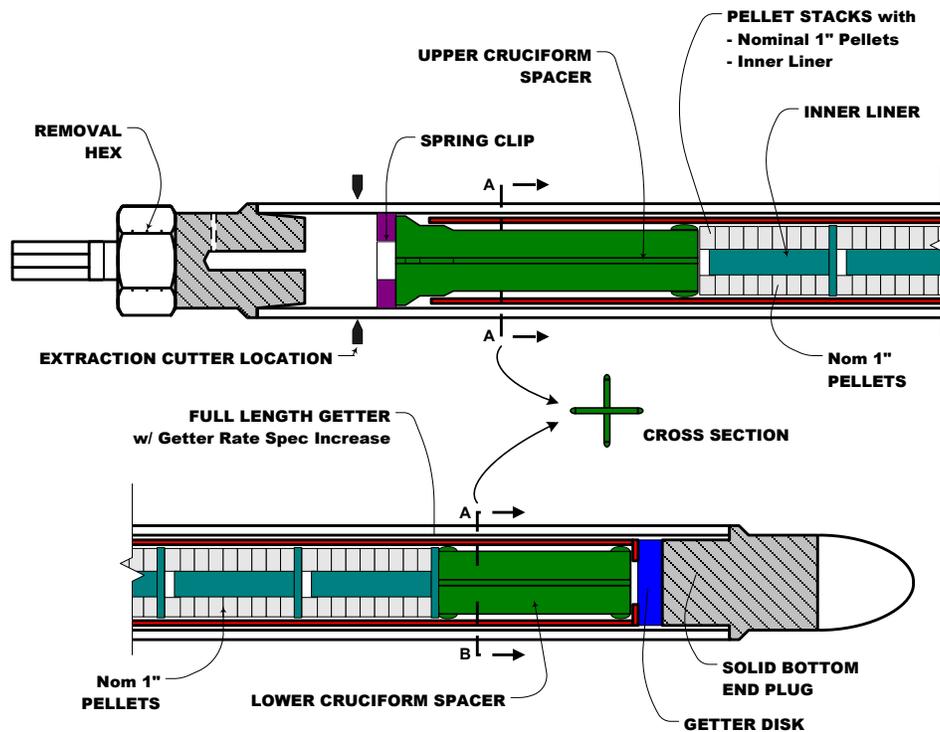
Axial Layout of Internal Components – Mark 9.2 and Mark 10 Designs. (Note: Getter disk on top of bottom end plug insert.)
